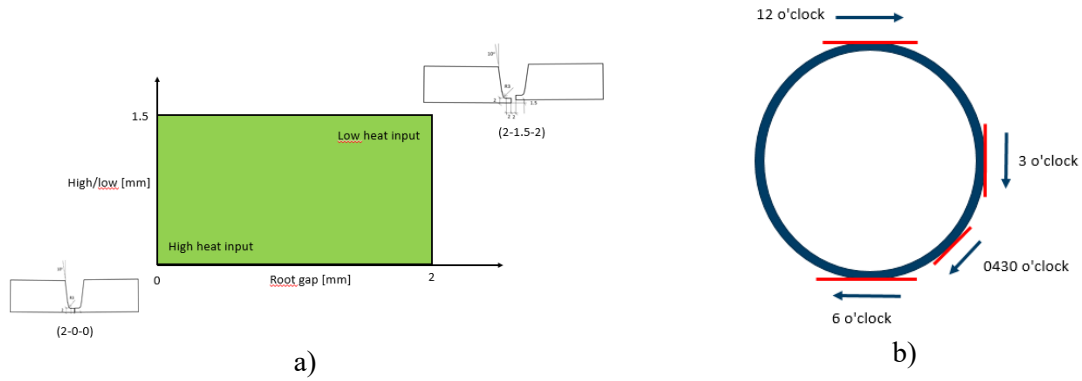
Groove configuration a) and welding position and direction b).
